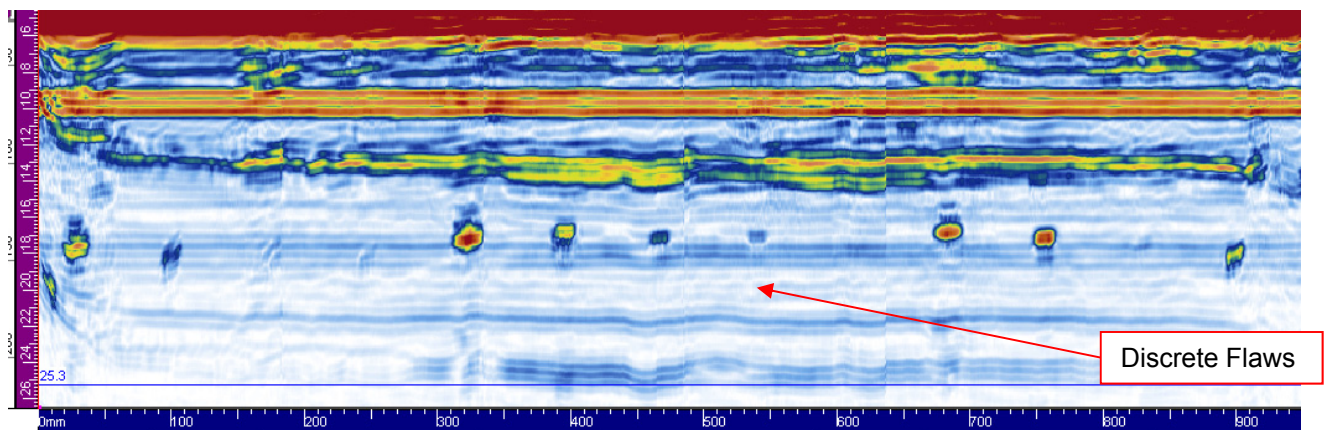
Typical scan of T-joint welded sample with discrete flaws.
